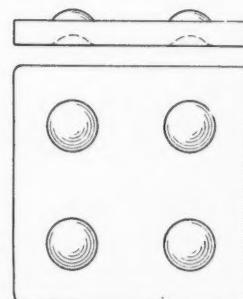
Form of washer projection-welded to brake shoe
